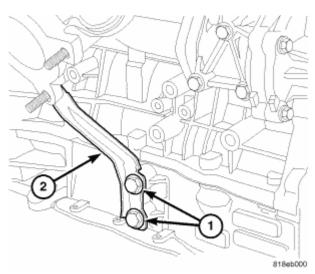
EXHAUST MANIFOLD SUPPORT BRACKET Courtesy of CHRYSLER LLC
